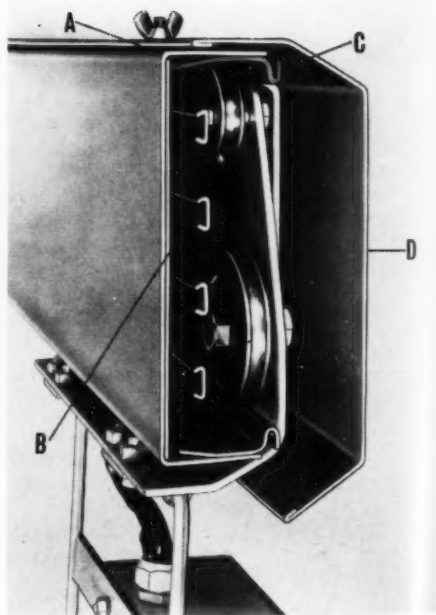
End view showing trolley in position, with runner strips, special rail section and removable cover. A Body section; B Conductor rails; C Runner sections; D Cover
